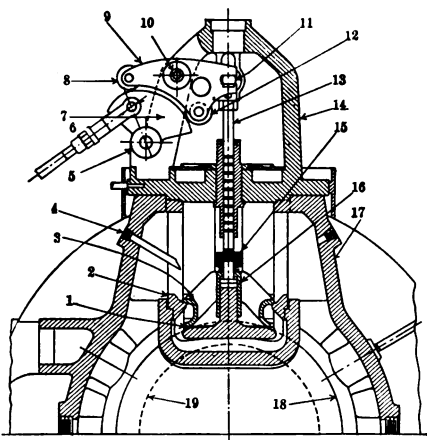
POSITIVE CAM VALVE GEAR FOR NORDBERG POPPET VALVE ENGINE
